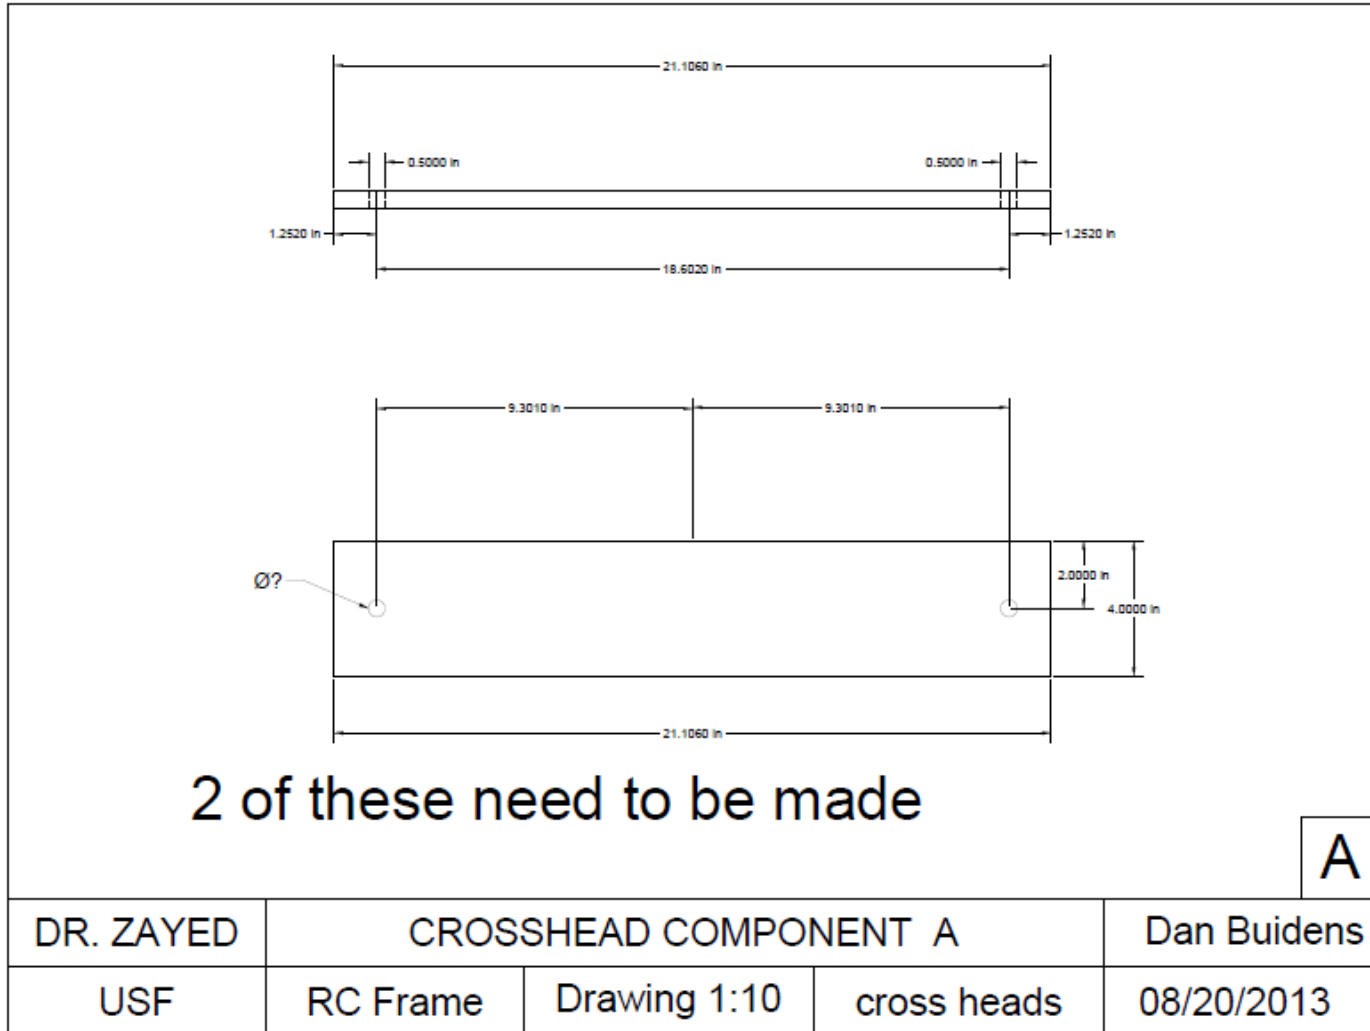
Shop drawings for cracking frame parts 1:9
